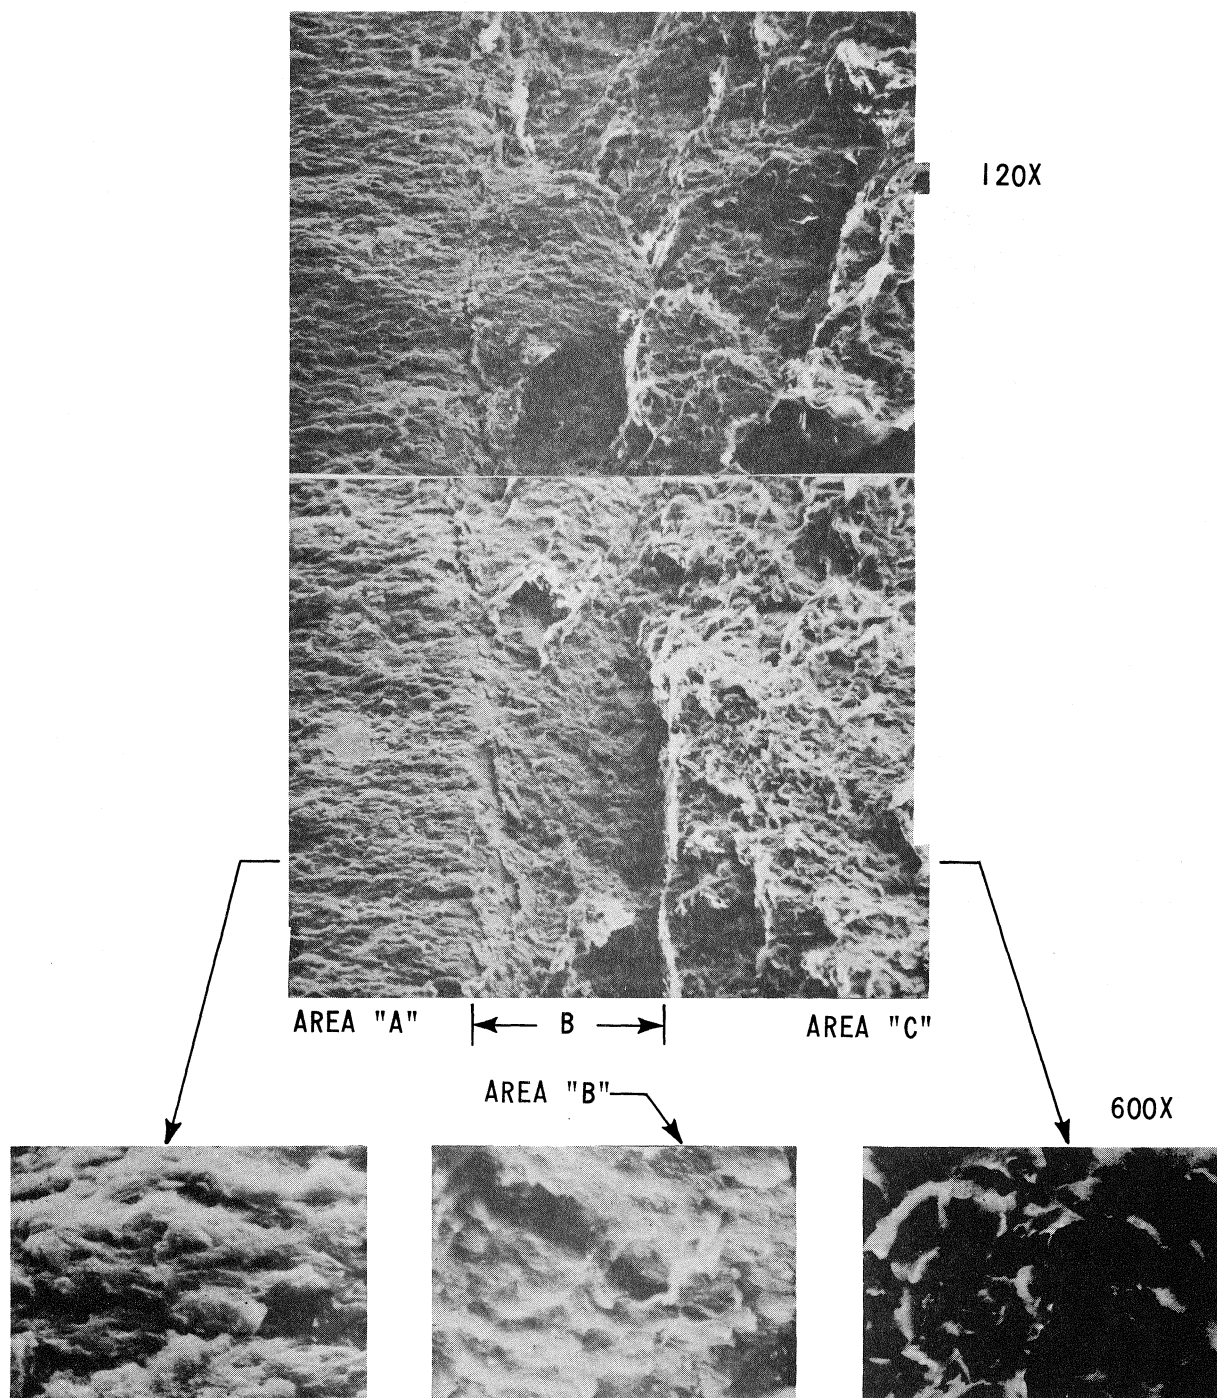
Three Fracture Areas Of W58-1 4T-CT Weldment Specimen After Break At $-18^{\circ}\text{C}(0^{\circ}\text{F})$. S.E.M. Photographs Illustrate Fracture Areas Characteristic Of: A, Fatigue Precracking; B, Fatigue Precracking; and C, Cleavage Failure
